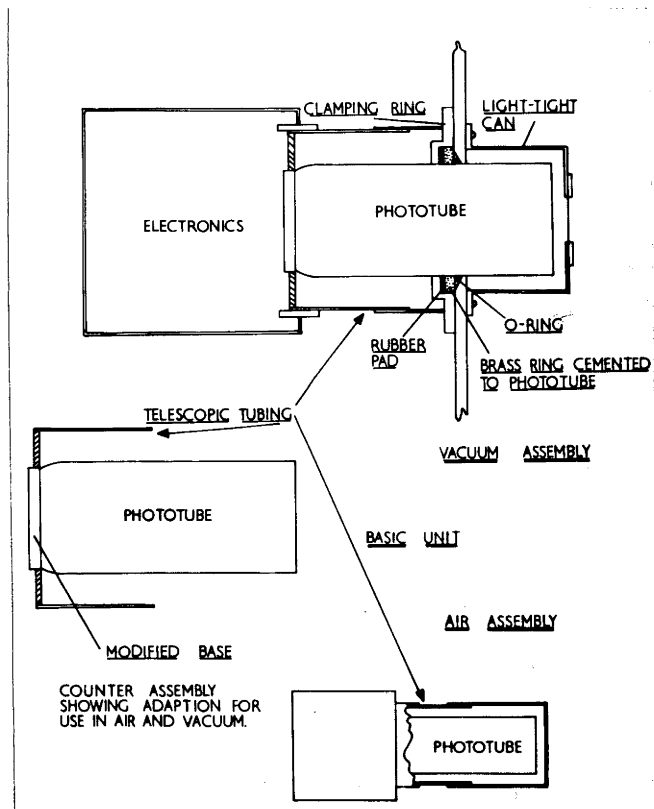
Basic unit to house the phototube and its incorporation into both air and vacuum assemblies.
